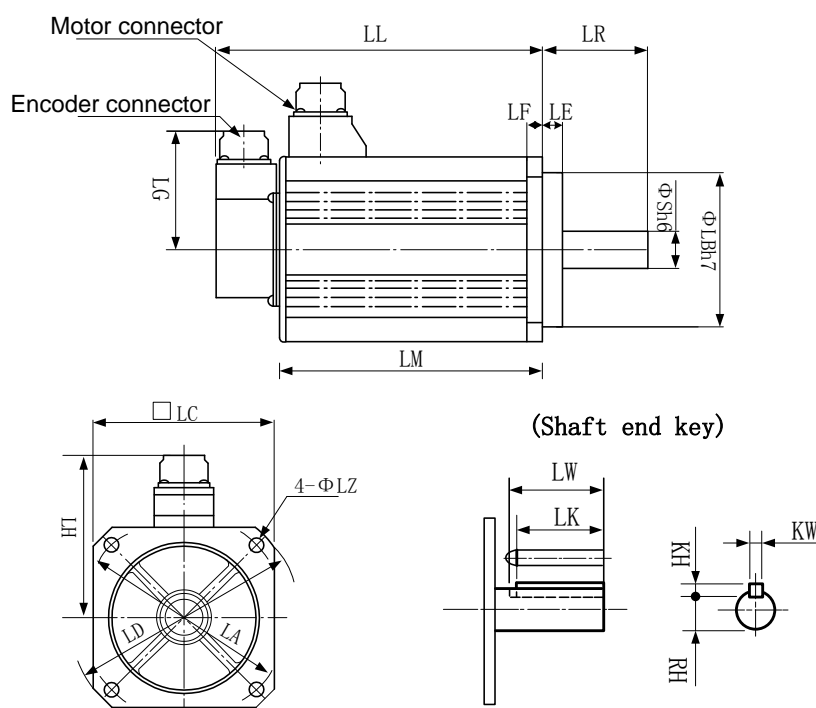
Dimensional drawing of MDME/MHME series servomotor
